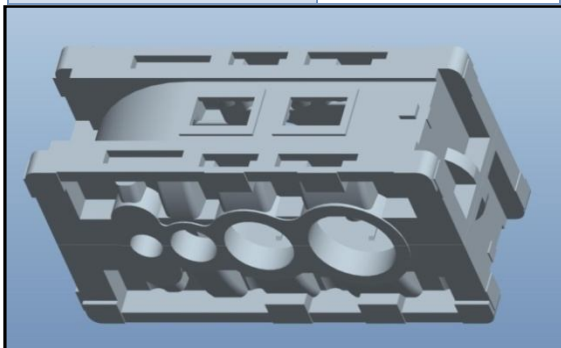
3-Dimensional Assembly modeling of Gear Case in Pro-E
